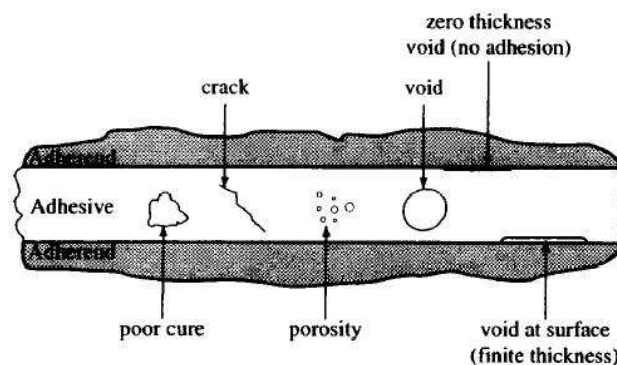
Main defects which could be found in an adhesive layer between two composite parts as shown by R. D. Adams and B. W. Drinkwater [31]
